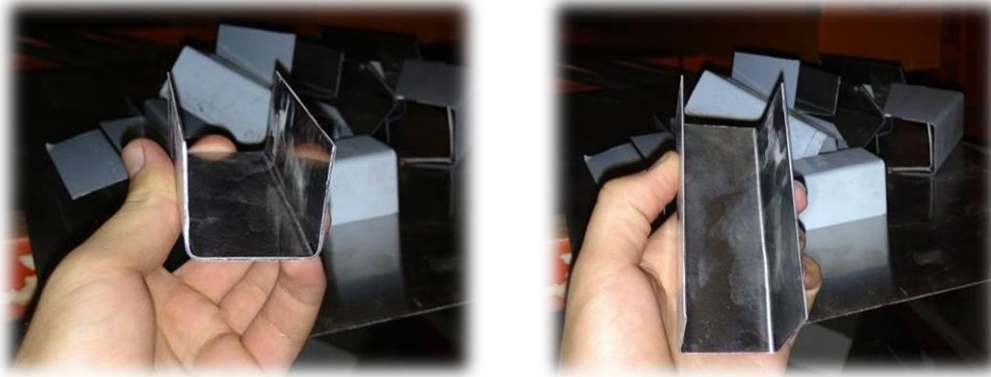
& 9b: Bending of stainless steel sheet to make brackets
